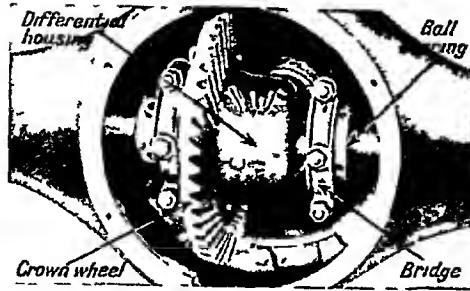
Back axle of a car with differential gear in a cage which carries the crown wheel
